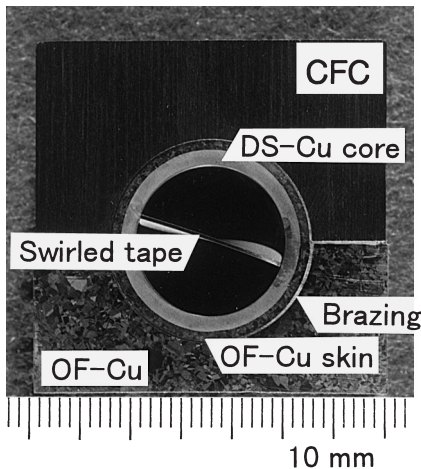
Metallographic image of a vertical section of a saddle type CFC/triplex tube (20 mm OD, 15 mm ID)/OF-Cu heat sink element joined with Cu-Ag-Ti braze.
